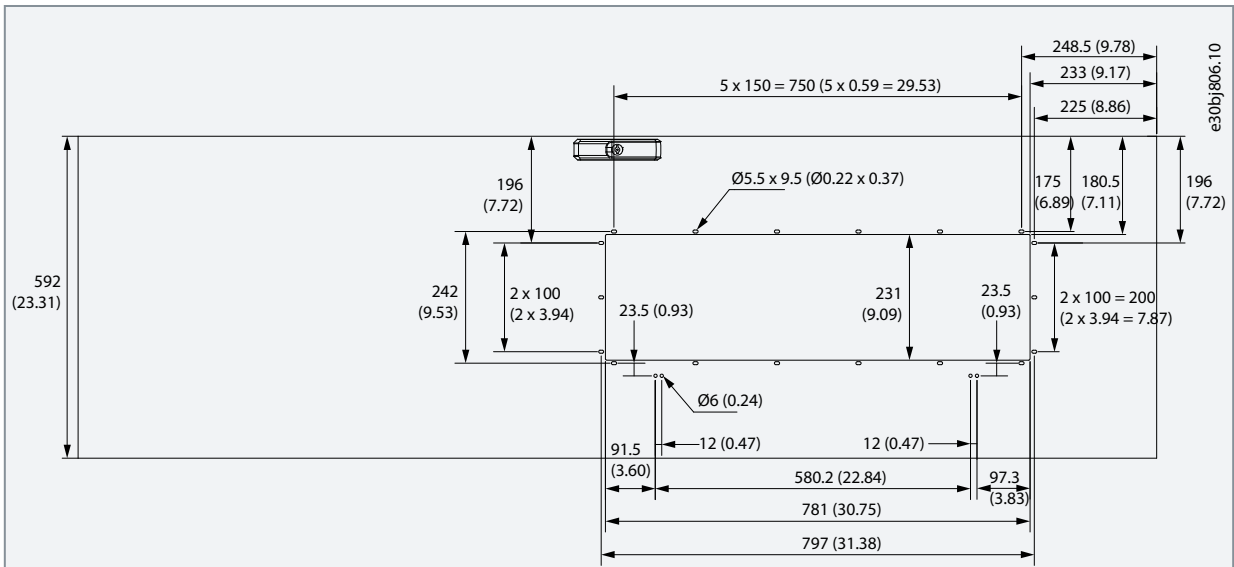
Dimensions for the Cut-out on the Cabinet Door in mm, Dual-pump Cabinet
